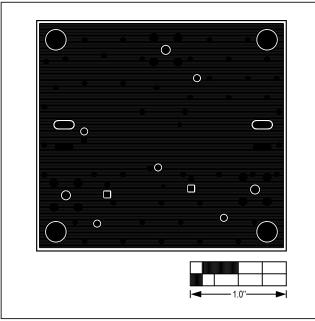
MAX44250 EV Kit PCB Layout—Solder Side
